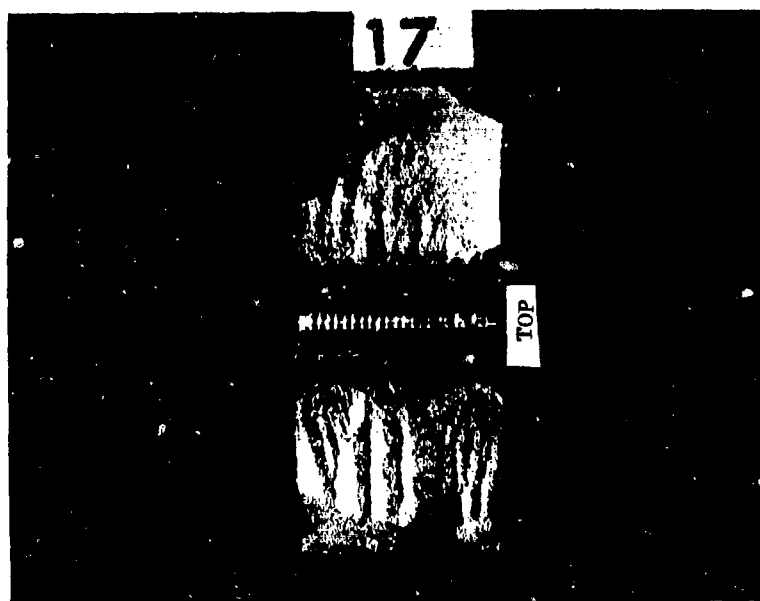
Close-up of Fatigue Failures of Specimens with Groovy-Pin and Tridair 1/4-28 Size Inserts. Inserts Installed by AFML. Torqued Bolts in Inserts During Tests.
